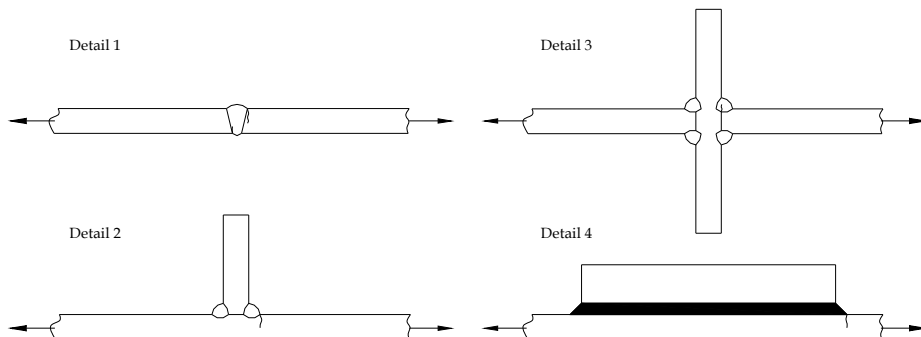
Potential cracking locations at the investigated welded details
